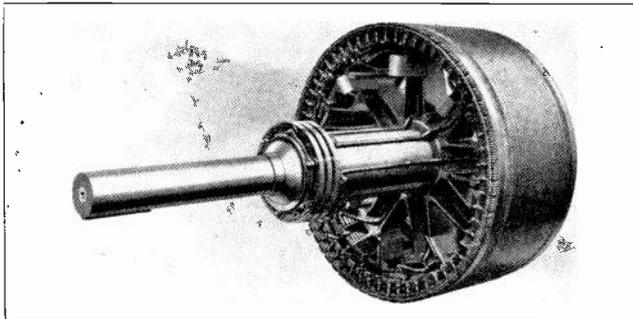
A. Phase wound rotor of a large slip-ring induction motor. This rotor has heavy bar windings which are not shorted together like those of a squirrel-cage rotor, but instead have connections brought out from each phase to the slip rings.
